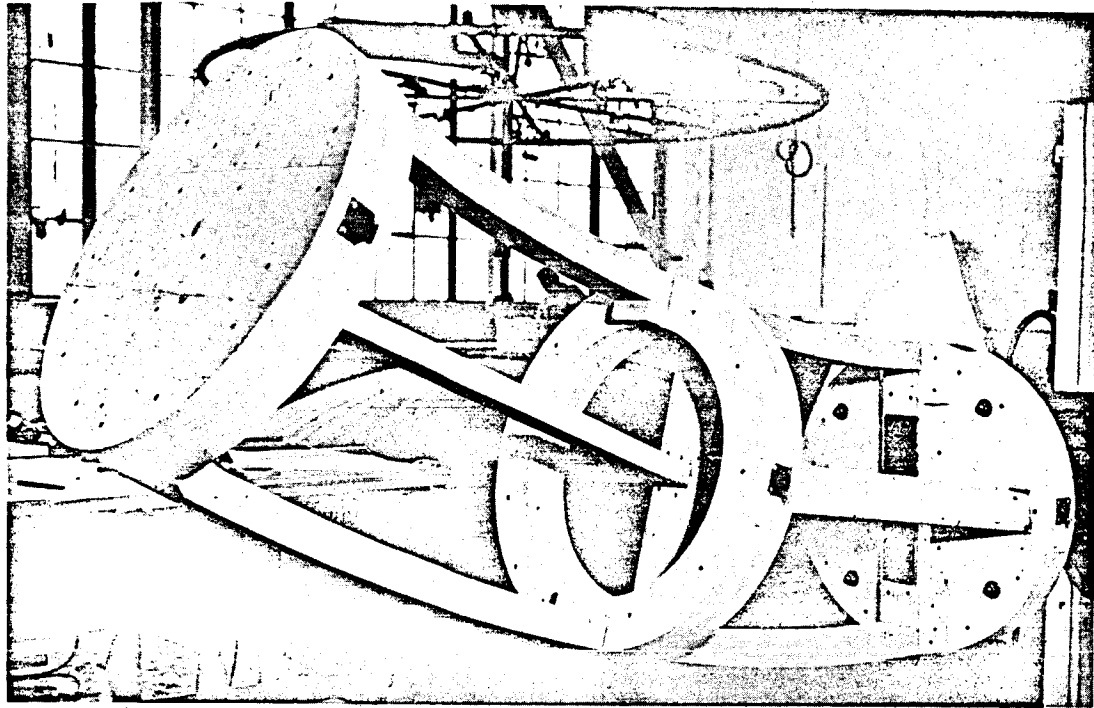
shows the torus assembly tool in two positions. The tool can be turned a full 360 deg and locked in four positions. Figure 32A shows the assembled bulkhead having the GT300 tape applied for bonding to the torus. After this operation the bulkhead was turned inside-out to put the adhesive side of the tape against the torus wall. Figure 32B shows the bulkhead mounted and being heat-sealed in place.
